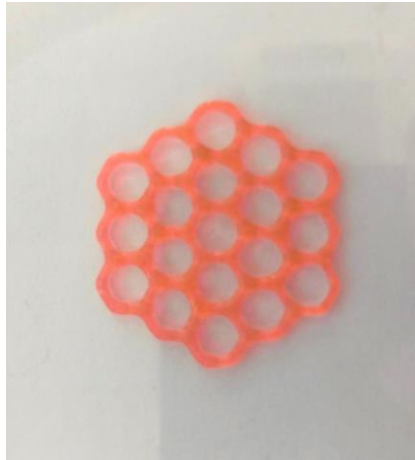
Photograph of the 5mm dimension honeycomb-like structure.
